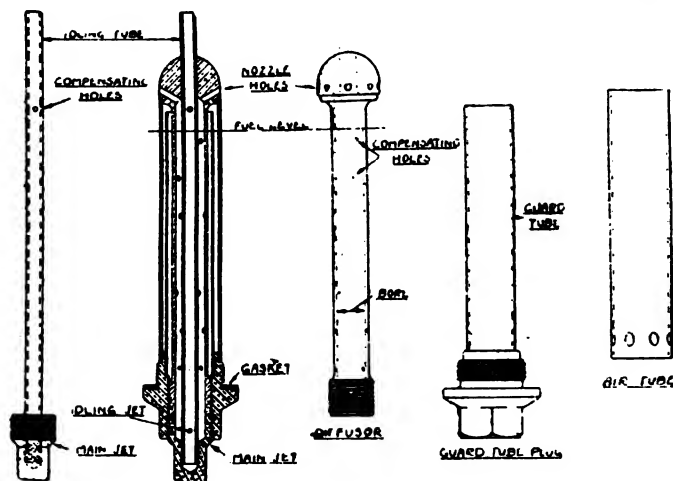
Diffusor, the principal part of the Claudel carburetor, in section, and its principal components.
